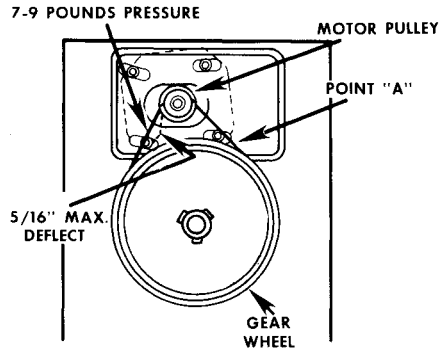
Belt Adjustment Rubber Bushing Mounting
